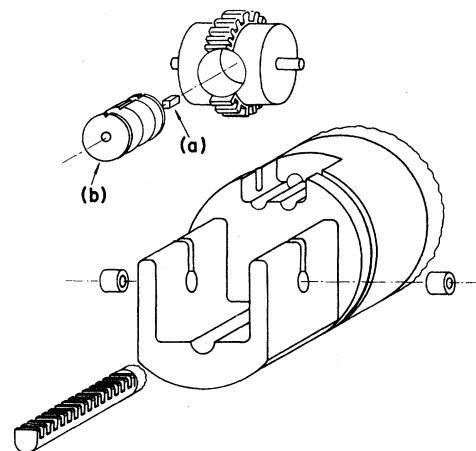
Exploded view of the lower section of the sample holder: (a) sample; (b) coil form.
